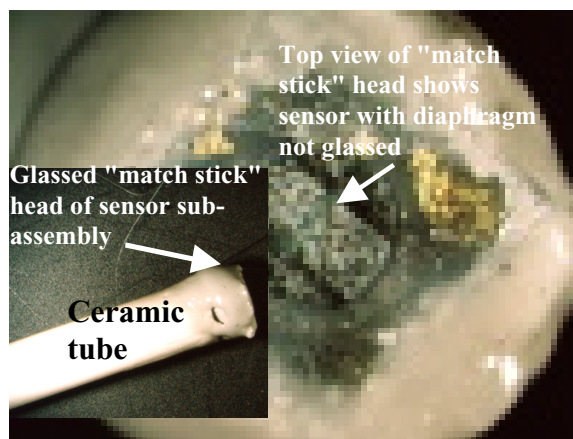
"Match-stick" type assembly in which the sensor sub-assembly is inserted into ceramic tube (inset) and then glass-encapsulated except for the diaphragm prior to insertion into stainless steel housing. This provided stress de-coupling between sensor and housing.
